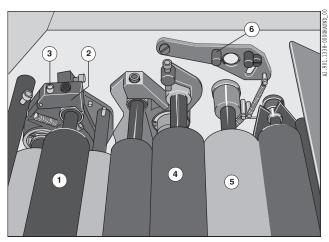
Inserting the 4th ink transfer roller and rider roller
